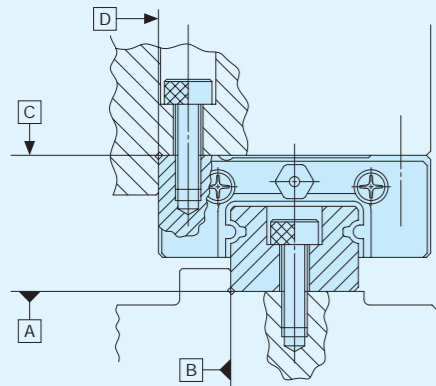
C-Sleeve Linear Way ML, ME and MH Reference mounting surfaces and general mounting structure
